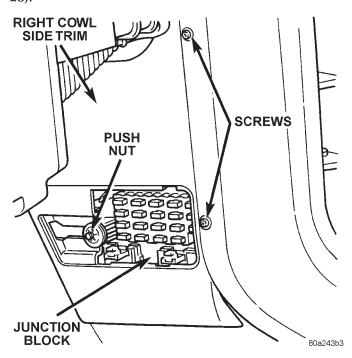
Right Cowl Side Trim Panel Remove/Install
